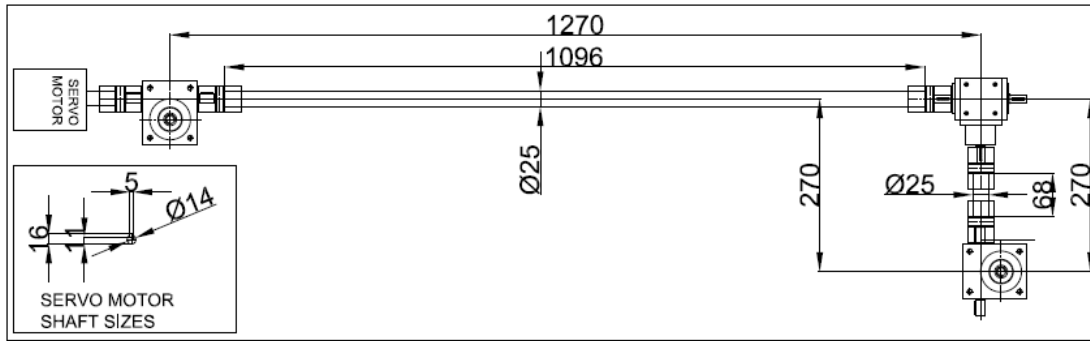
Dimensions of the screw jack assembly (Unit: mm)
